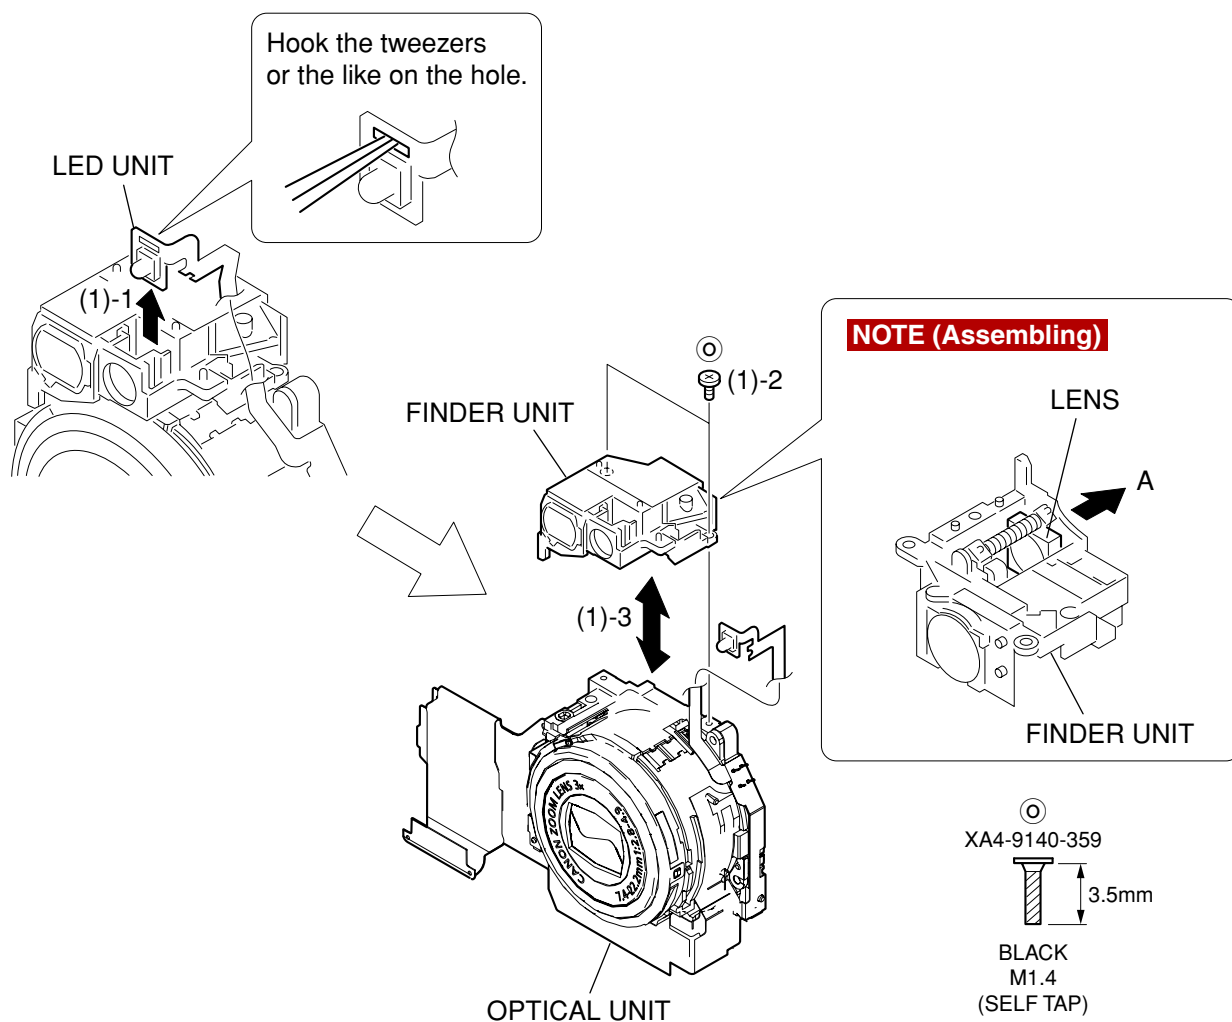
OPTICAL UNIT, FINDER UNIT - (2)
